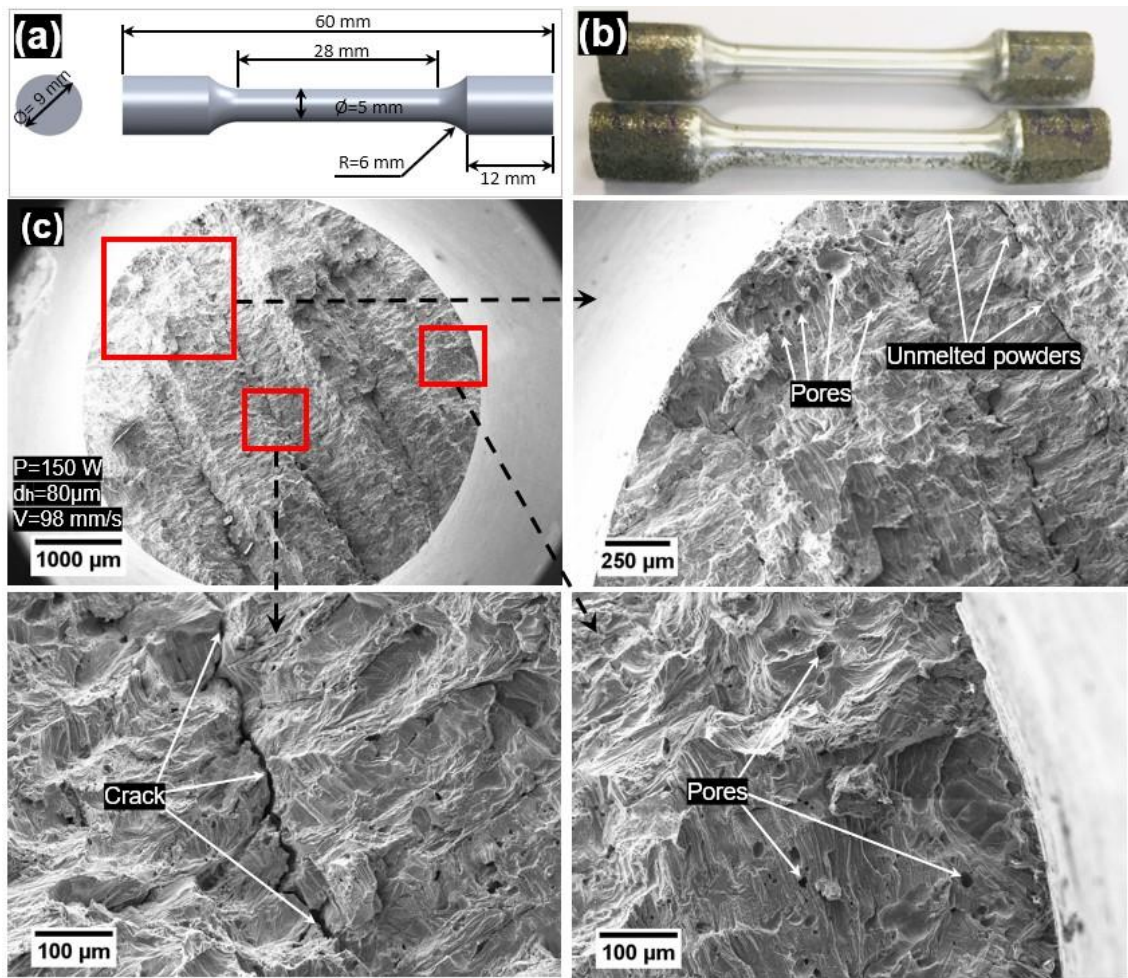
Dimensions of as-fabricated tensile testing specimens (a-b), and SEM images showing the fracture surface (c).
